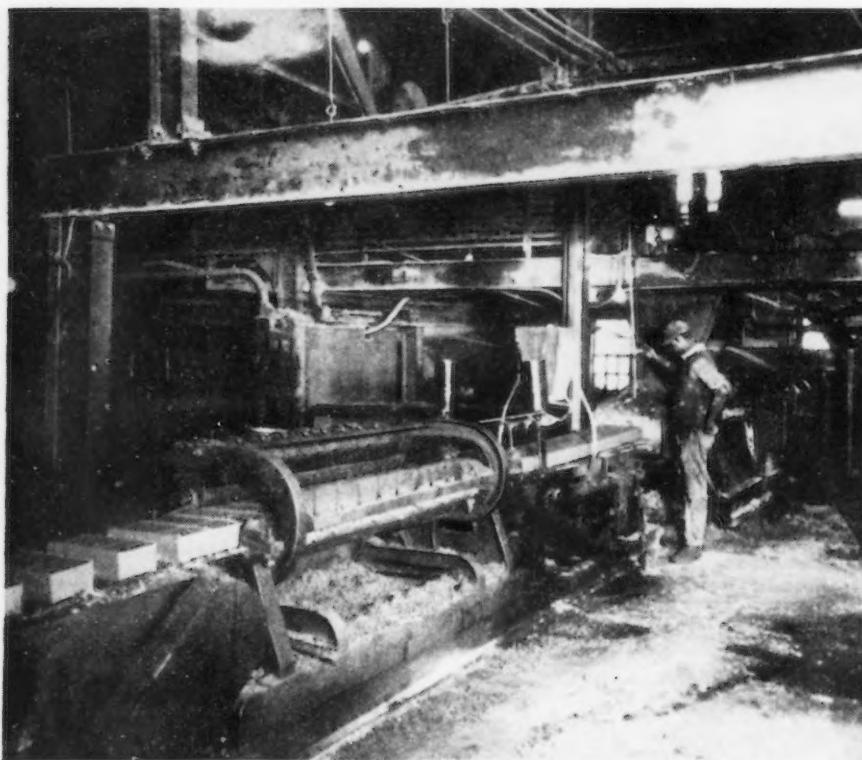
Extruding and cutting blanks for stiff mud (steam press) bricks. These blanks will be dried slightly and then repressed.
